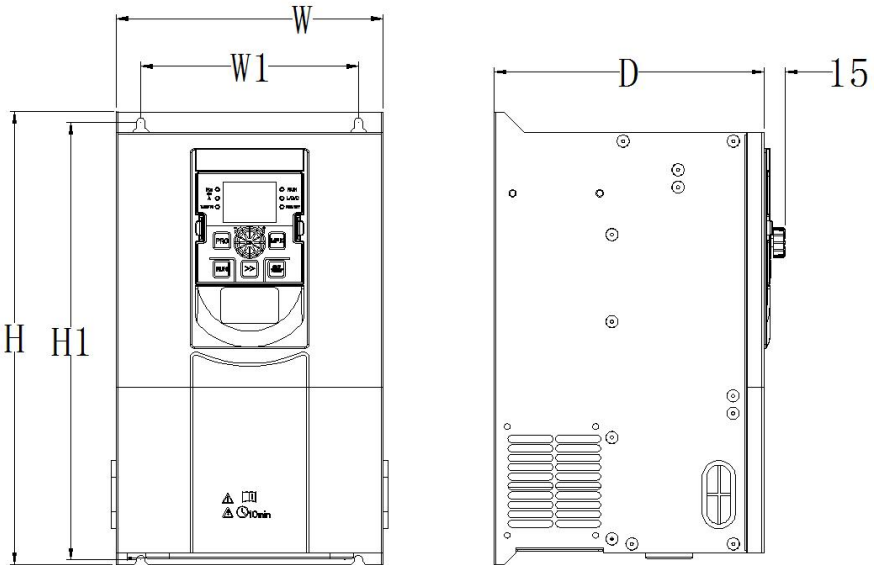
Metal External/Installation Dimensions for 380V (4T) 15~200kW
